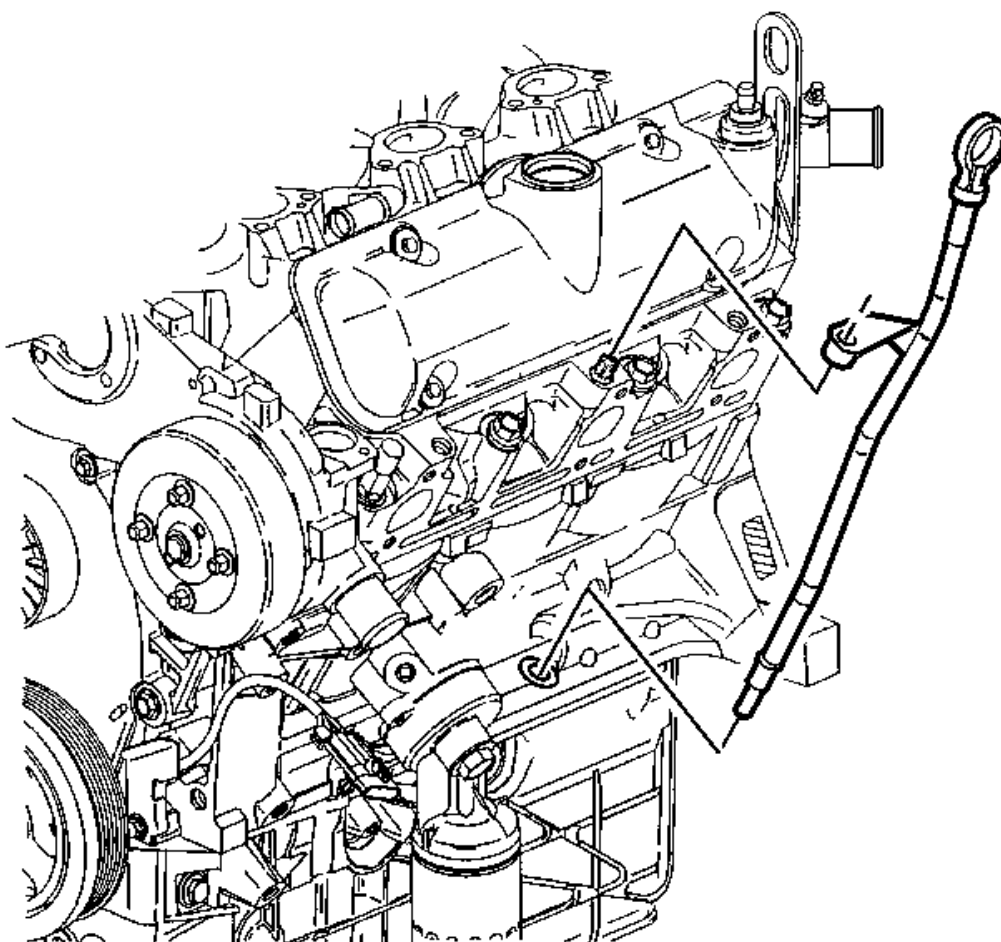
View Of Oil Level Indicator & Oil Level Indicator Tube
